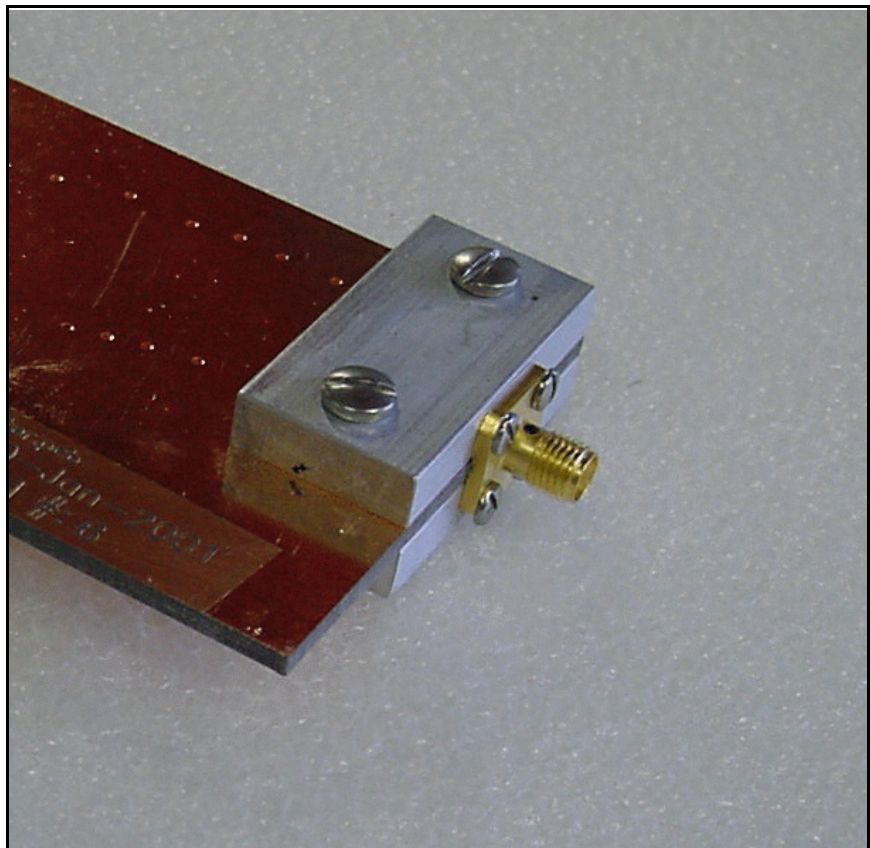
Completed assembly of the connector on the circuit card. Note that all the 2-56 screws are to be used.
